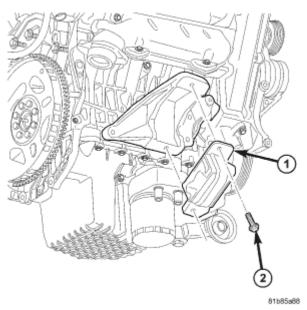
Right Engine Mount Courtesy of CHRYSLER LLC
